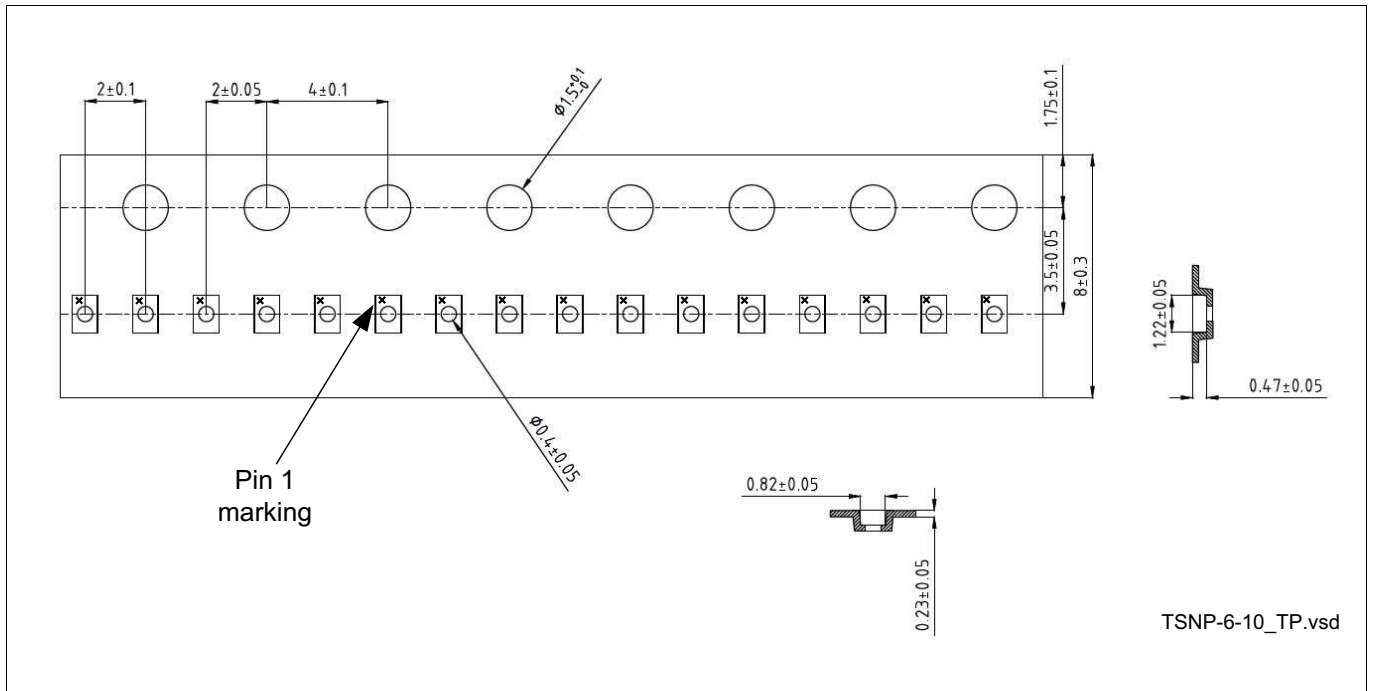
Tape & Reel Dimensions TSNP-6-10 (reel diameter 180 mm, pieces/reel 12000)
